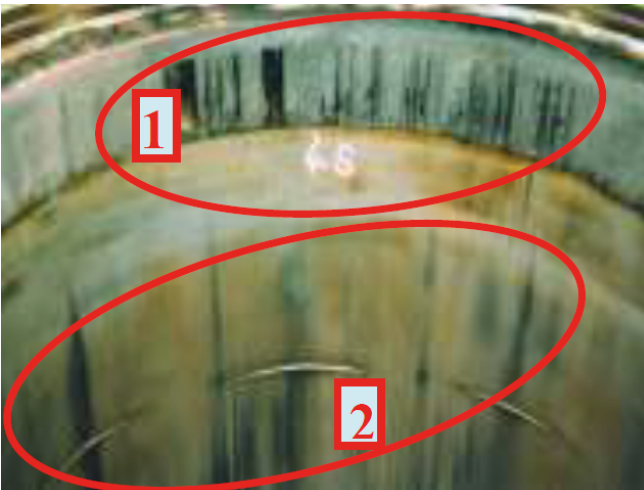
View of damaged inner sliding surface of a cylinder liner due to excessive wear caused by: 1 - friction corrosion, 2 - pitting corrosion [6, 21, 25]
